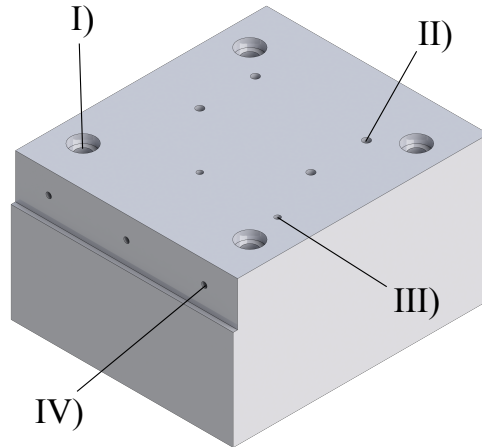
Aluminum socket to mount the cage system. I) Four M6 counterbored holes to screw the aluminum block to an optical table, II) four M4 threaded holes to connect with the cage system via plastic screws, III) two M3 threaded holes to place the protection circuit, IV) three M3 threaded holes to place a metal plate that holds the plugs for the temperature and current controllers.
